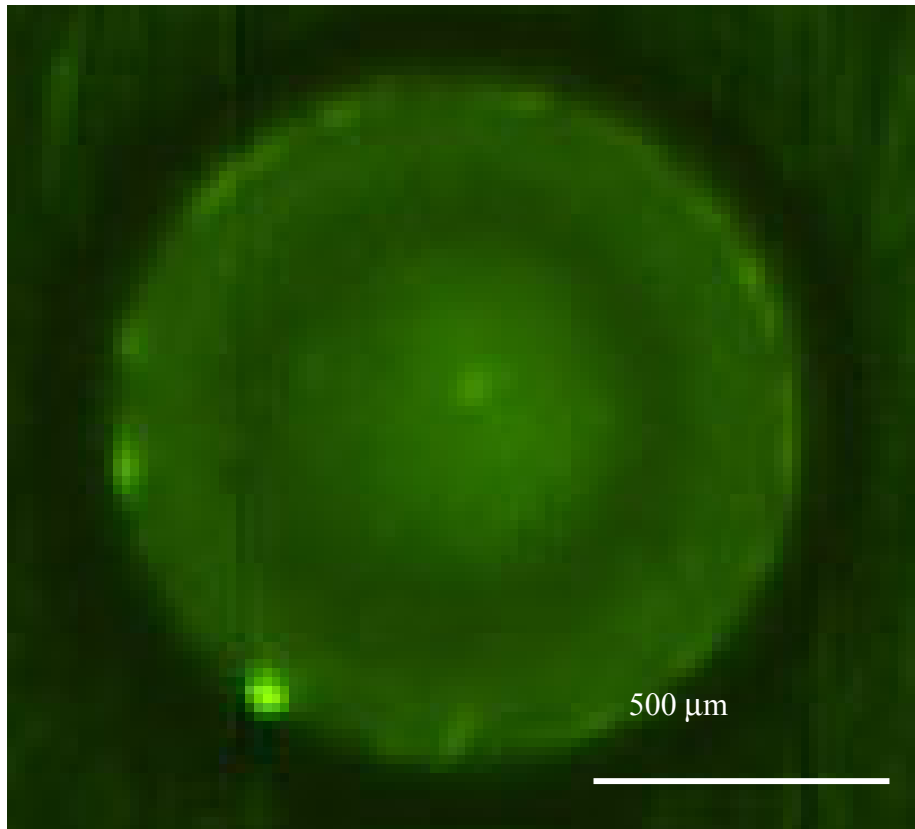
A still image of a laser spot weld in 304 stainless steel.
